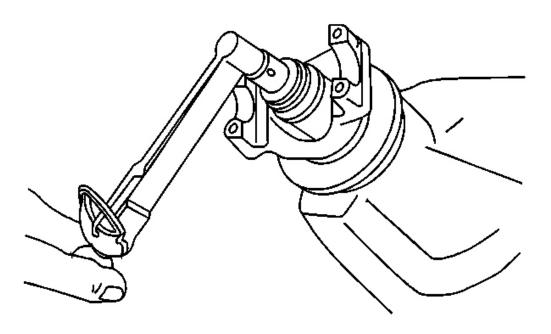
Measuring Pinion Rotating Torque Courtesy of GENERAL MOTORS CORP.
